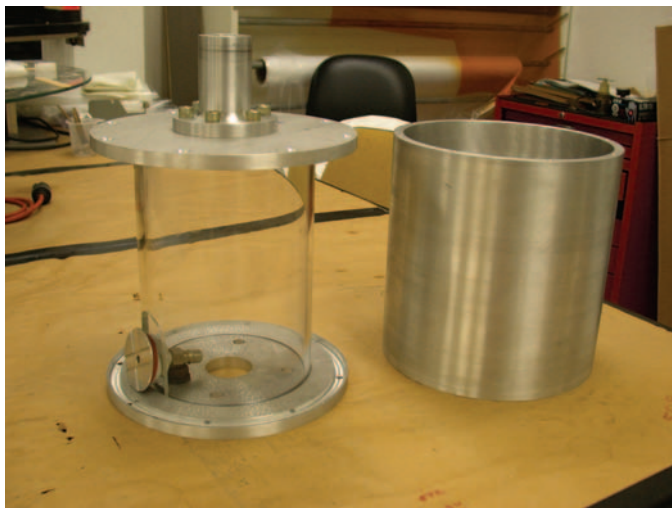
Disassembled RVARTM tool showing plexiglass compaction mass barrier and vacuum port.
